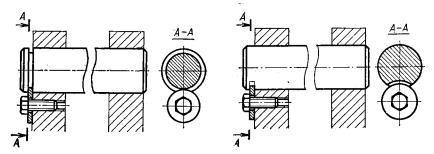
Pivot pin fixed against axial and angular displacements by screw and washer
